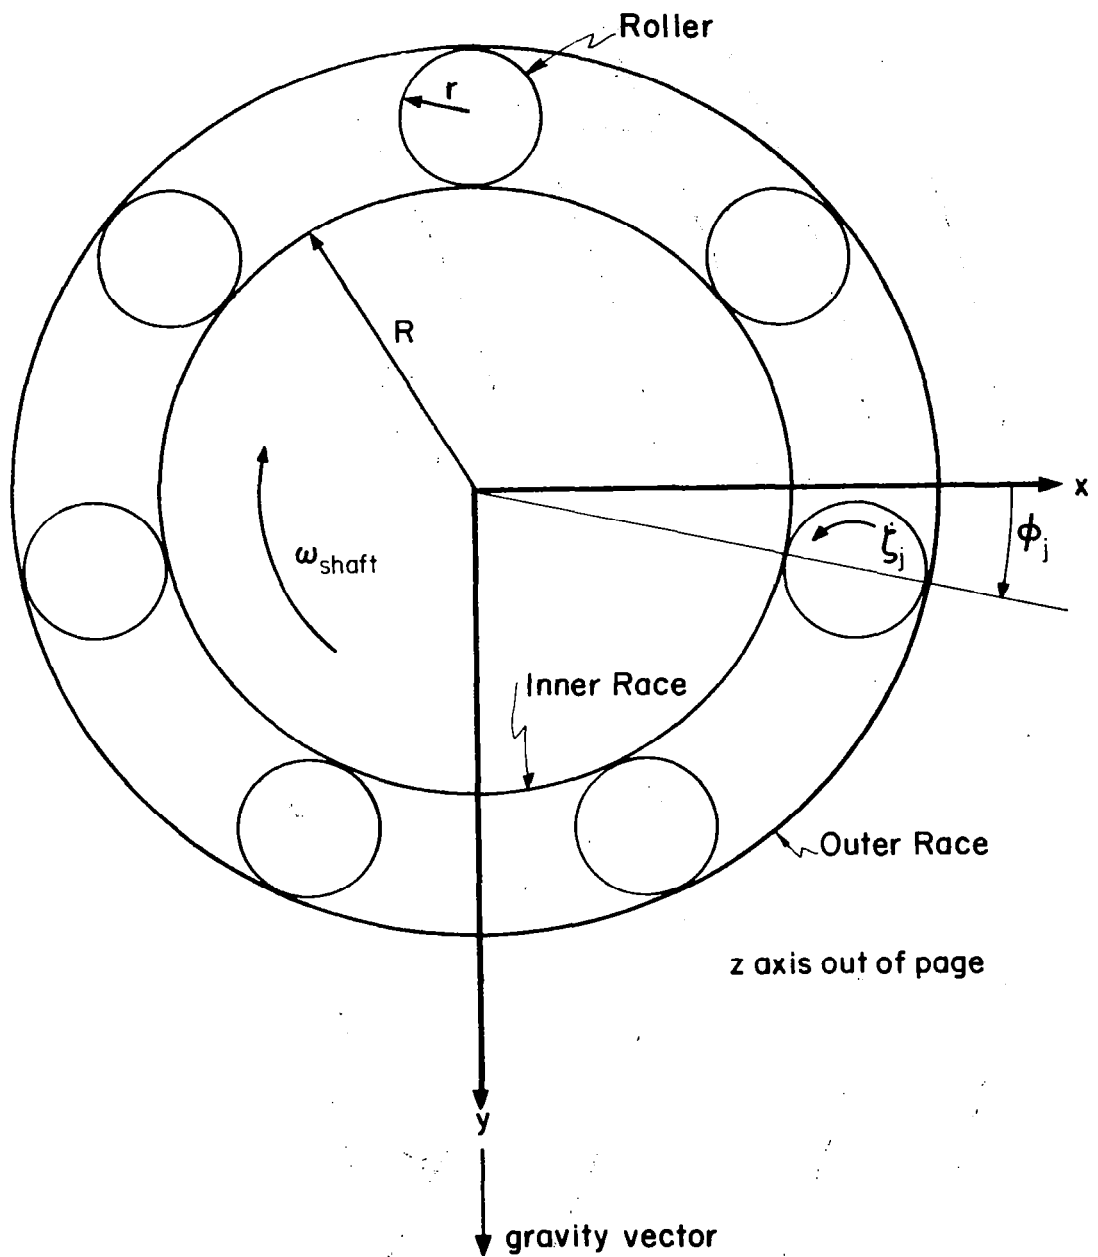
The Global Coordinate System for the Cylindrical Roller Bearing
